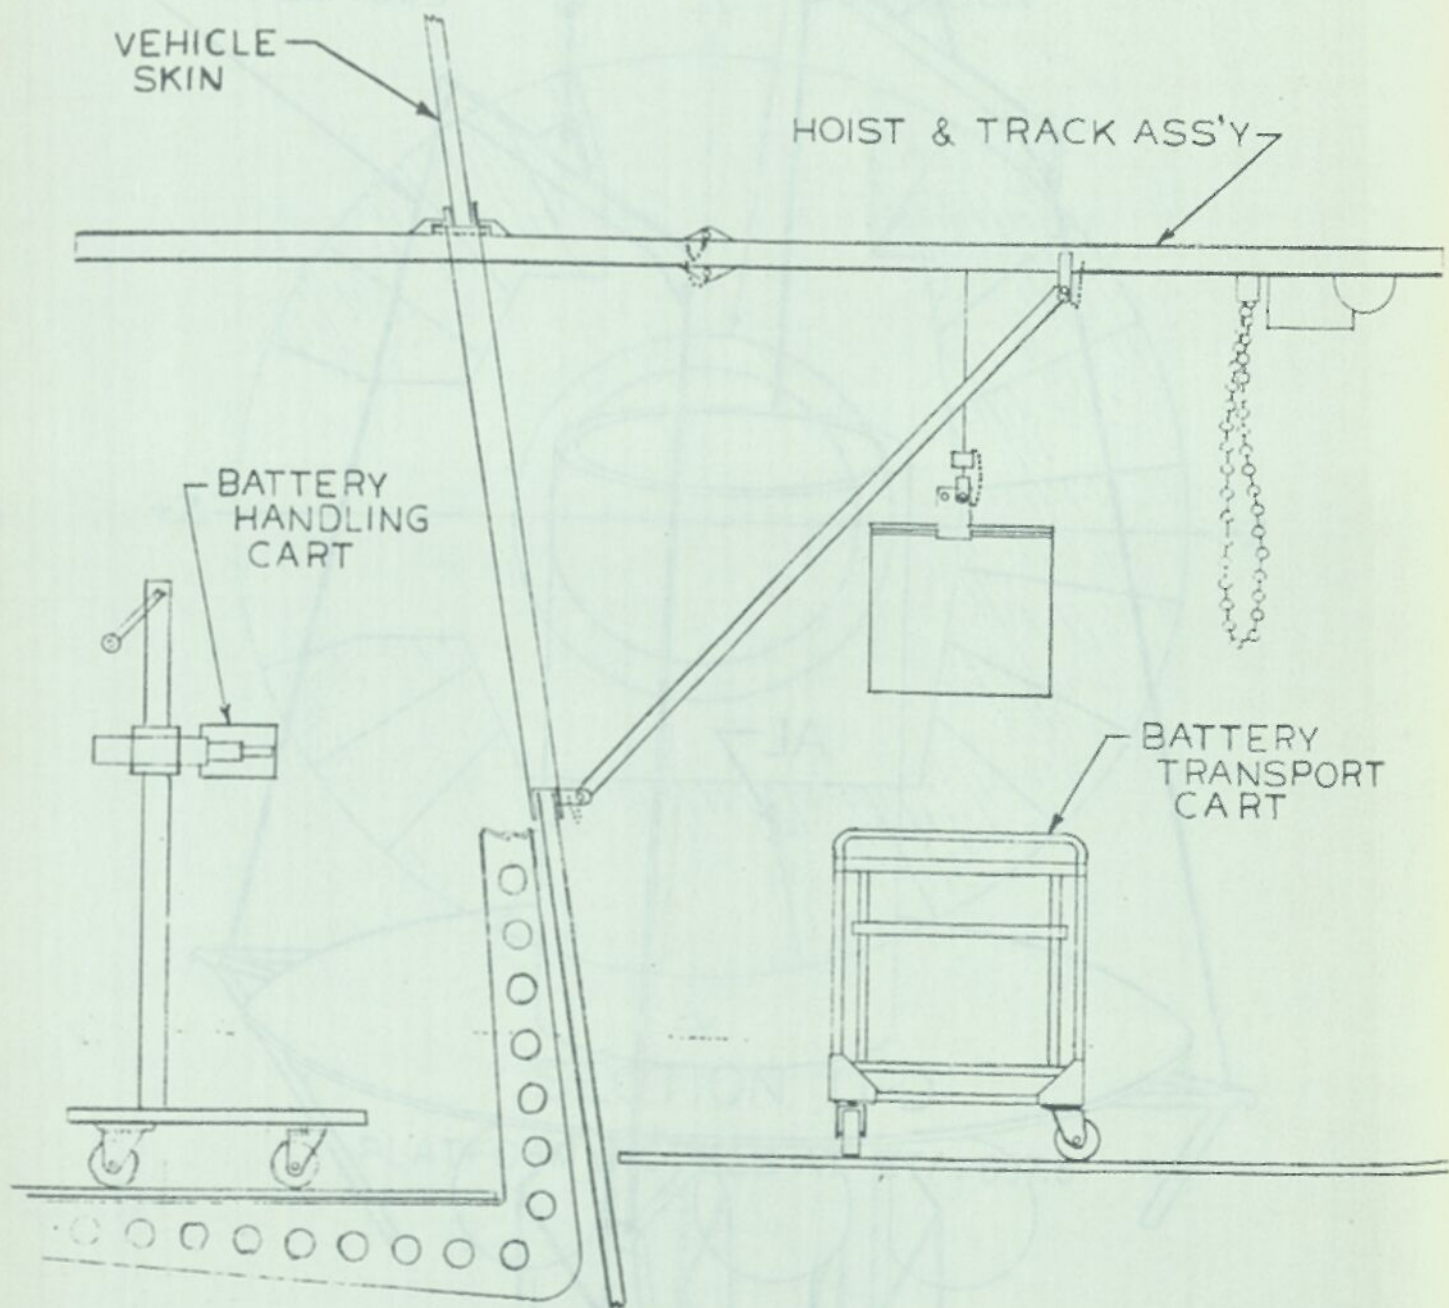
COMPONENT HANDLING EQUIPMENT
